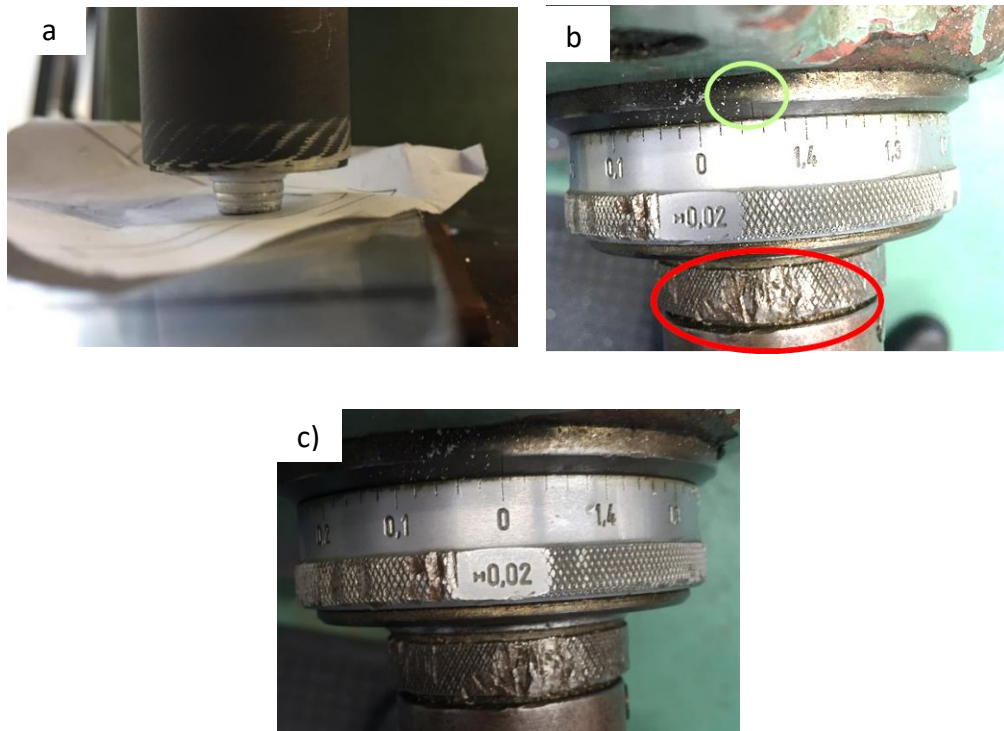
7 (a) Pin down until pressing the paper tight; (b) Gauge fastener circled red and gauge marker circled in green; (c) Zero position.
